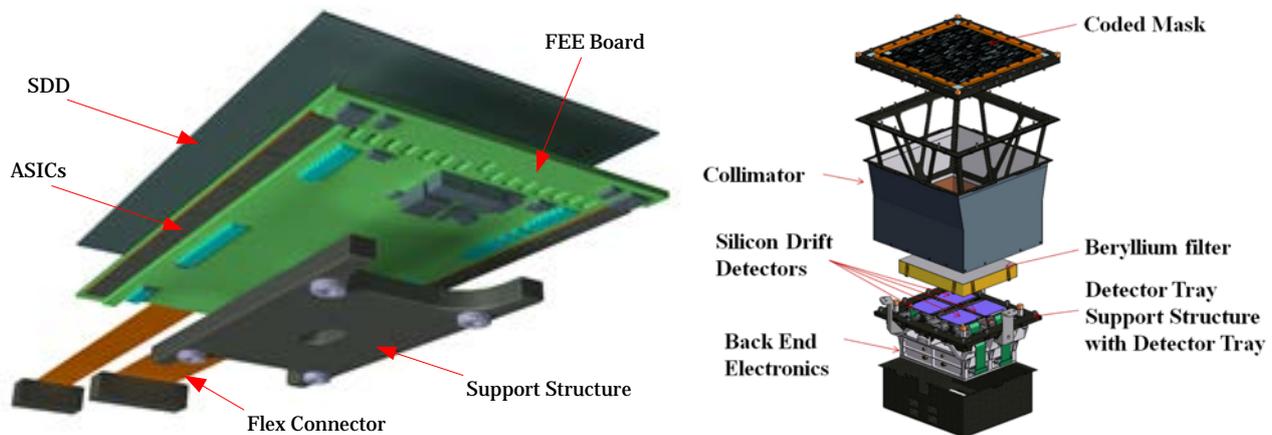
LAD Detector Assembly (left) comprising Silicon Drift Detector (SDD), and Front End Electronics (FEE) Board with readout ASICs; WFM Design (right)
